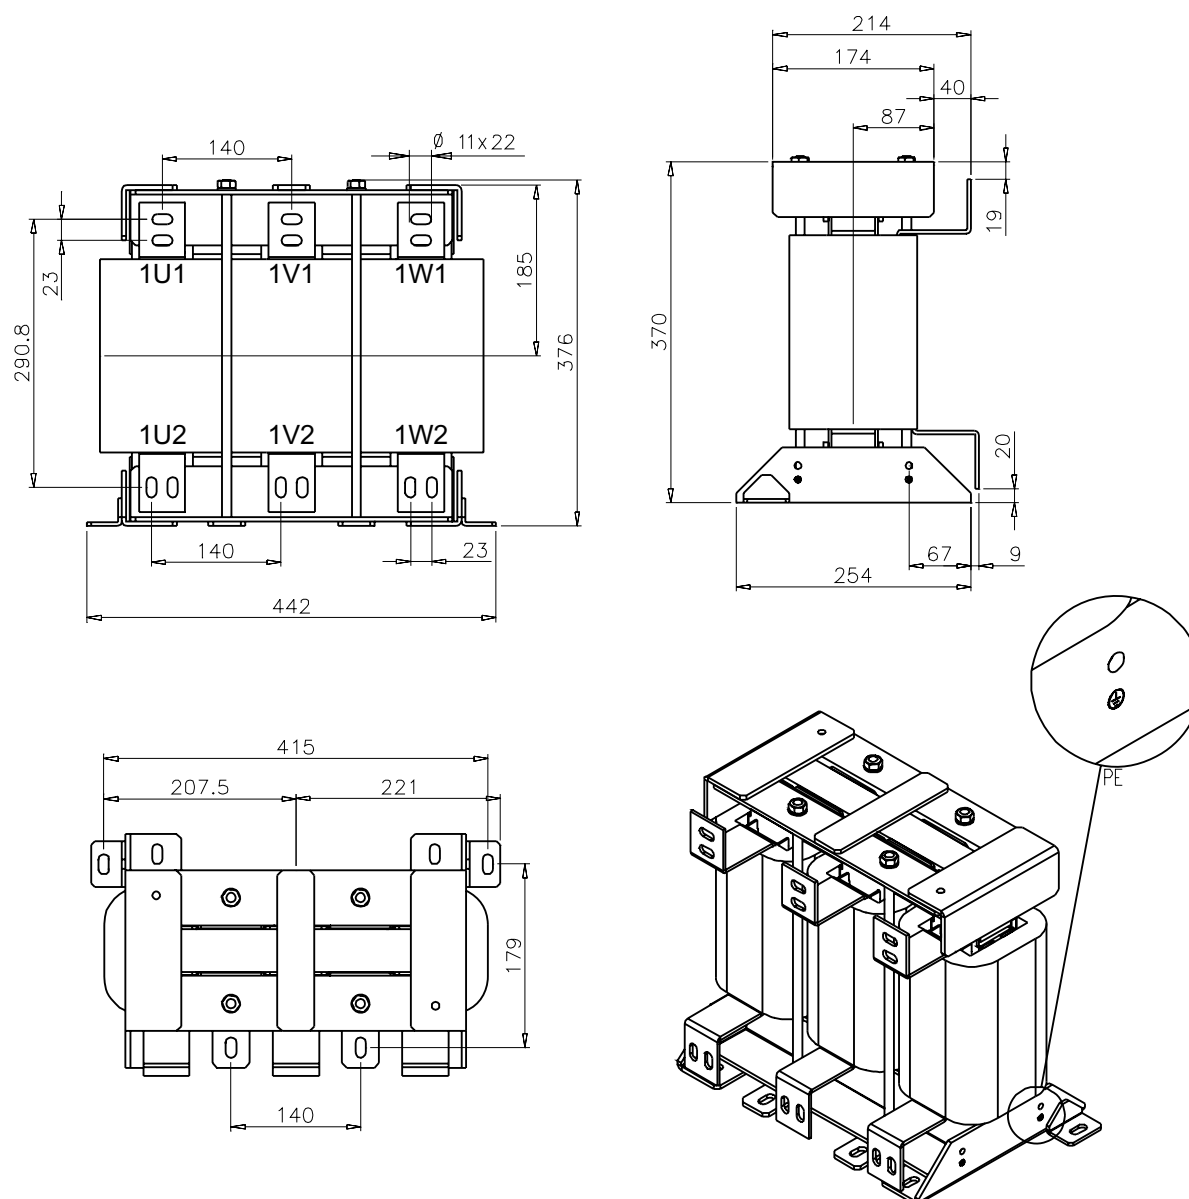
Dimension drawing of line reactor 6SL3000-0EE38-8AA0, all dimensions in mm
